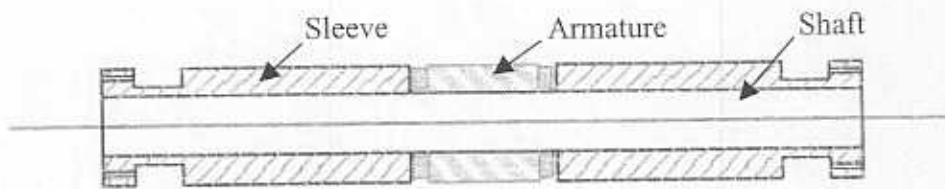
Schematic of rotor assembly displaying a solid shaft, integral motor, and sleeves
